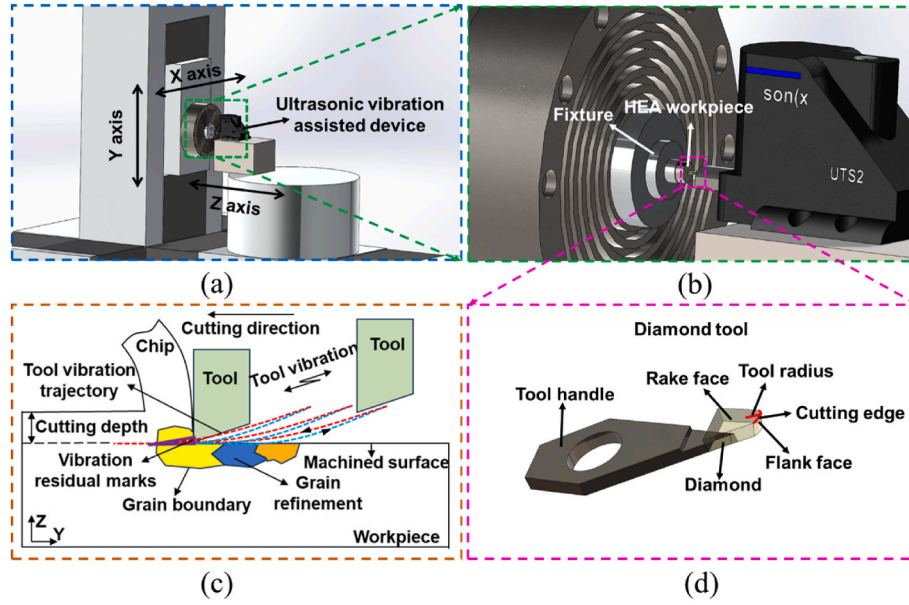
Schematic diagram of UVDC processing of HEAs. (a) Overall layout of machining device; (b) Particulars of the cutting process; (c) Process of removing materials in intermittent cutting; (d) Diamond tool.
